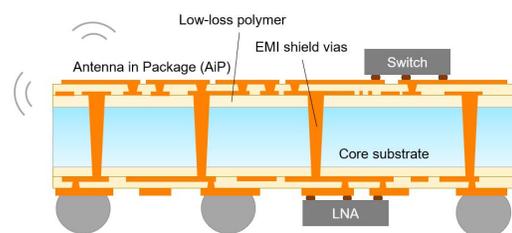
Antenna-integrated packages with mm-wave chips assembled.
